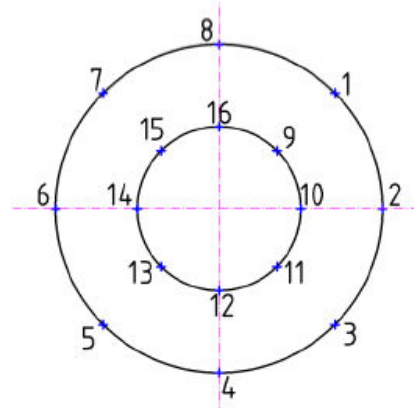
Scheme for measurement of composite disc with a shaft insert opening (D2).
